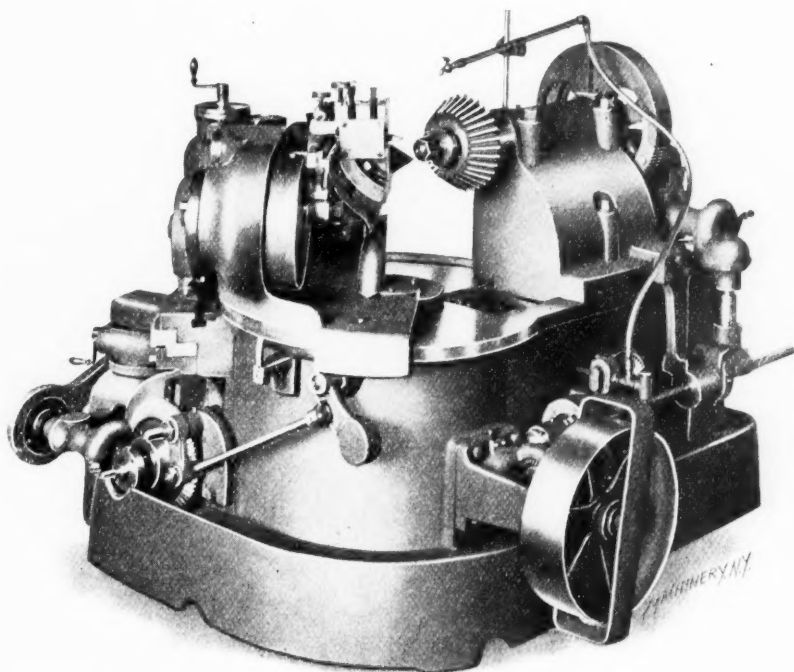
Gleason Templet-controlled Bevel Gear Planing Machine.
